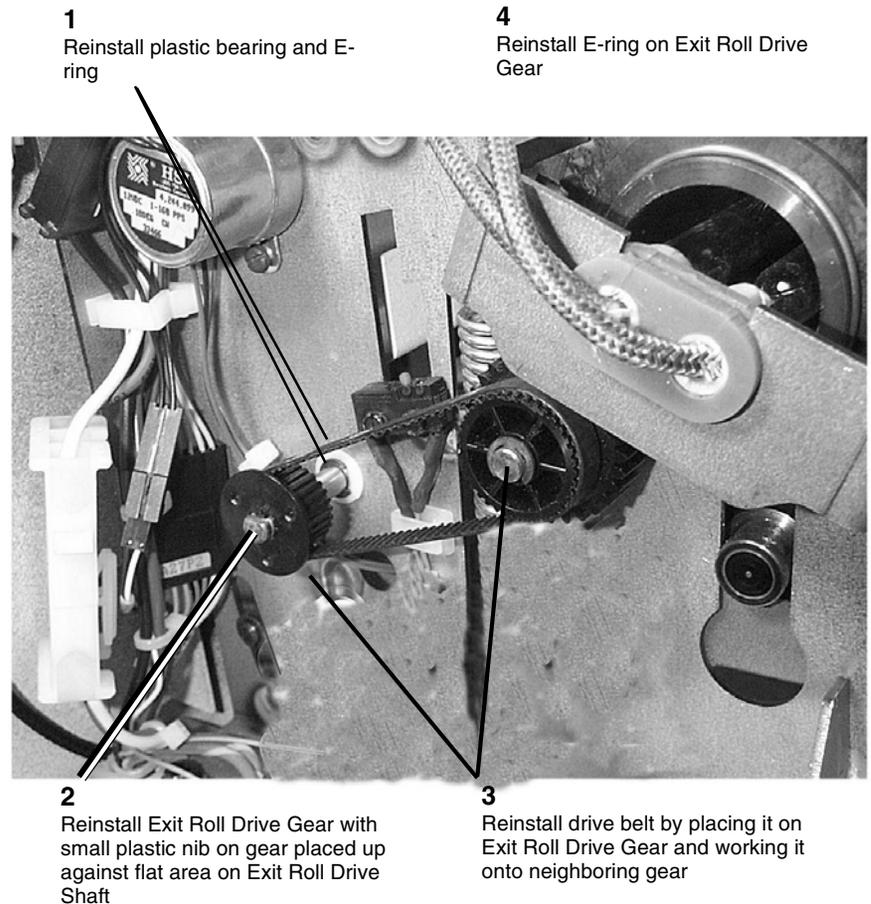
Identifying the Right Side of Exit Drive Roll Shaft
